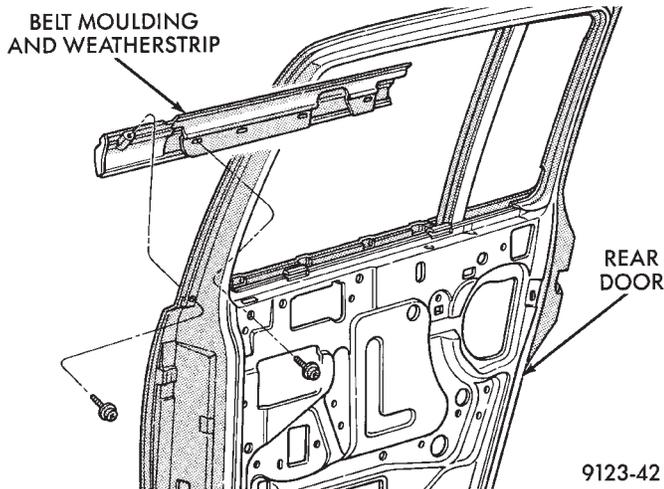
Rear Door Belt Moulding and Weatherstrip
